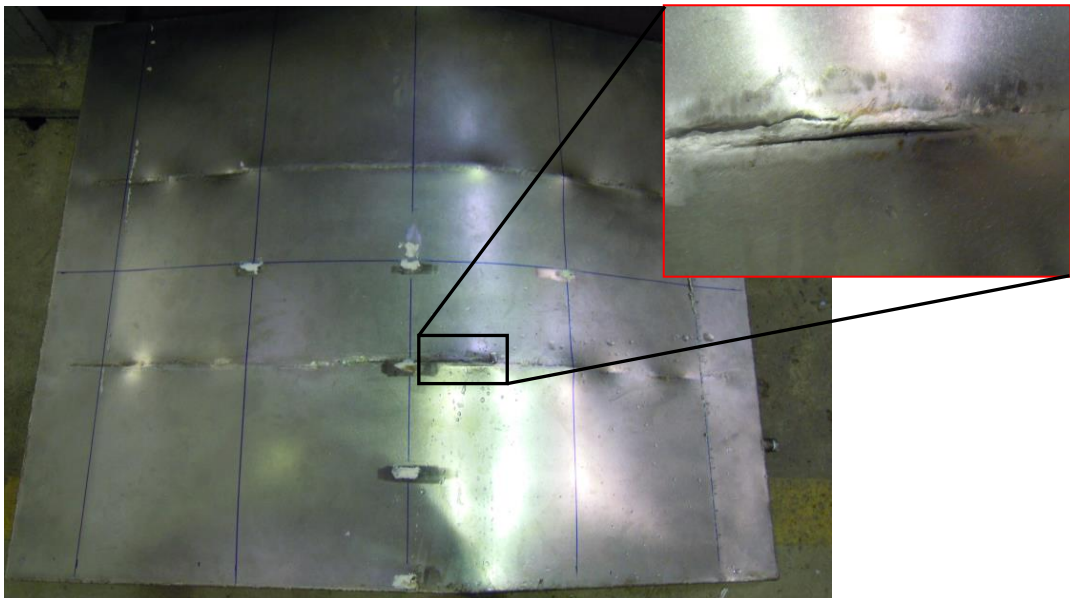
Fracture of weld between bottom plate and stiffener of SWS tank
